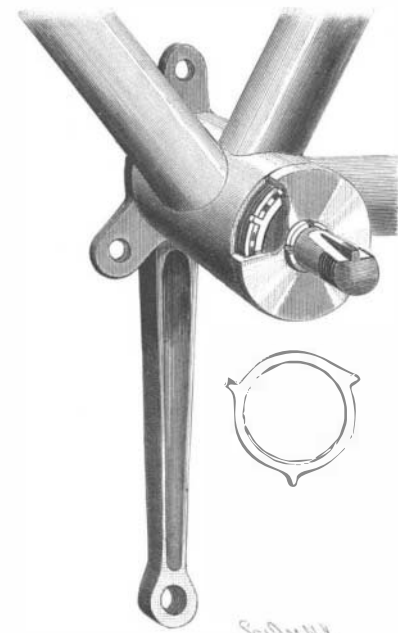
ADJUSTMENT OF CRANK HANGER BEARINGS.
